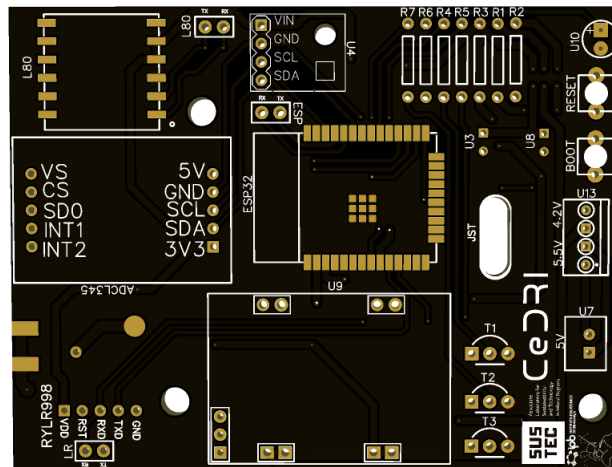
PCB to device upper part electrical circuit. This image show the pins, figures, local of electronic components and other PCB details.
